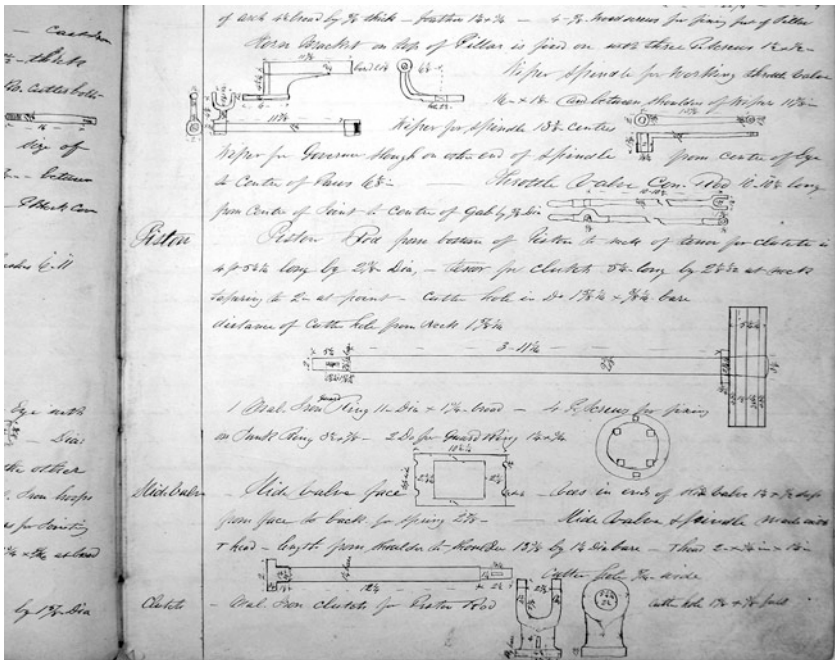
Example of engineer's notebook detailing piston arrangement¹²
